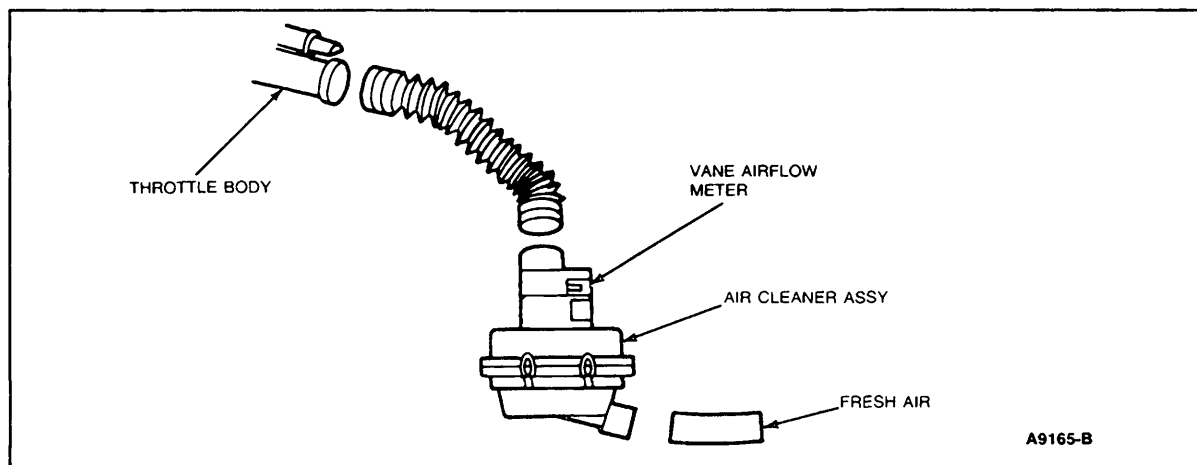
Typical Air Cleaner System — 1.9L EFI (Passenger Car)
